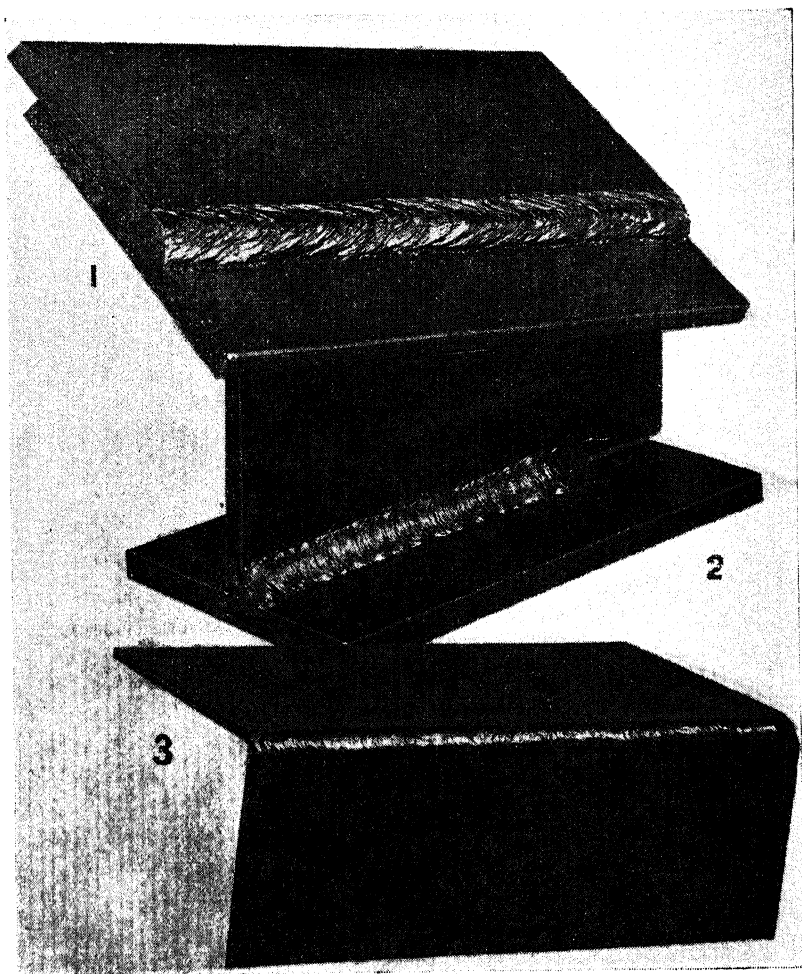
A. Welds produced with Type B Electrode. (1) Lap weld in 3/16-in. plate. (2) Fillet weld in 3/16-in. plate with 1/16-in. gap (poor fit-up). (3) Corner weld in 1/8-in. plate.
